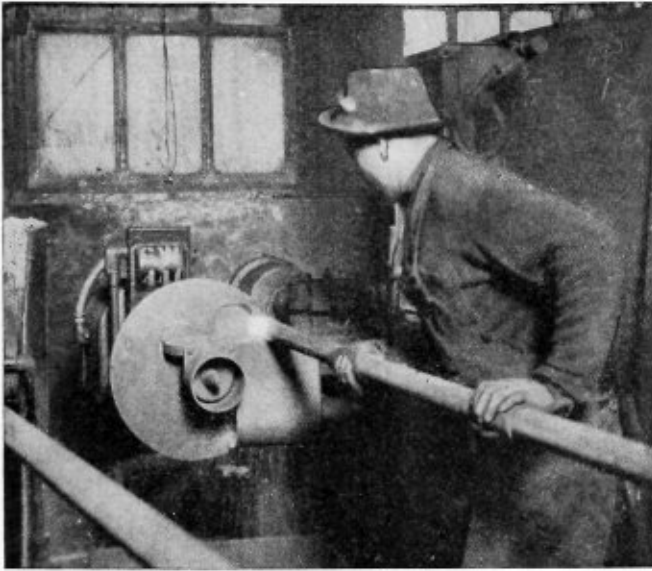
After Heating, the Fag Ends of Tubes Are Cut Off, Expanded and Safe Ends Inserted on This Combination Machine
